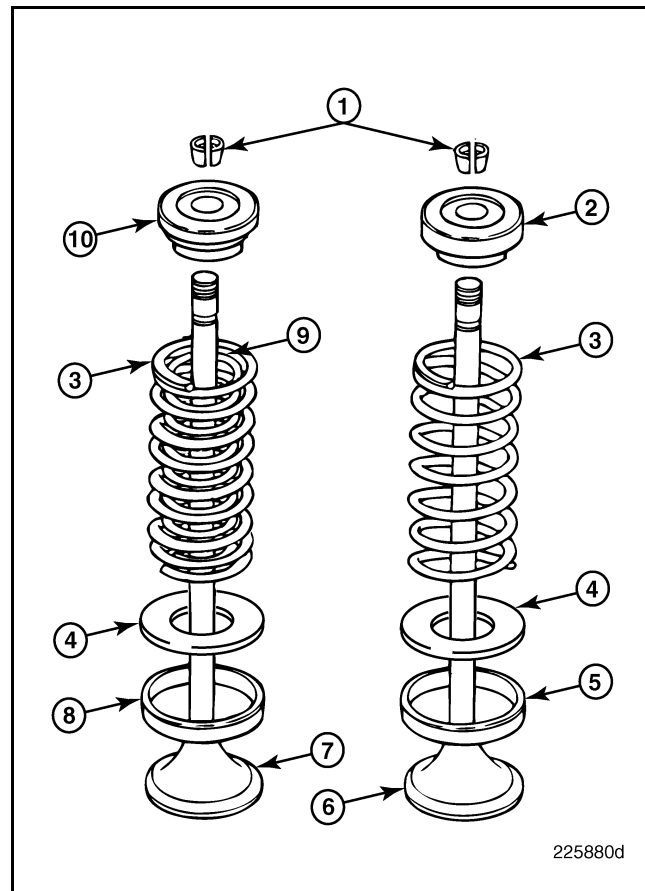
Valve Spring, Rotator and Valve Seats (Non-Current Design — Prior to Mid-2003)
